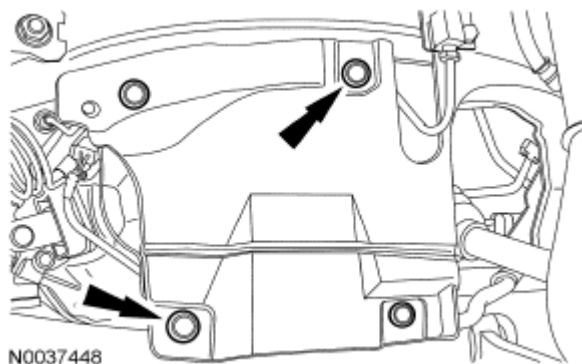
Locating LH Splash Shield And Pin-Type Retainers
